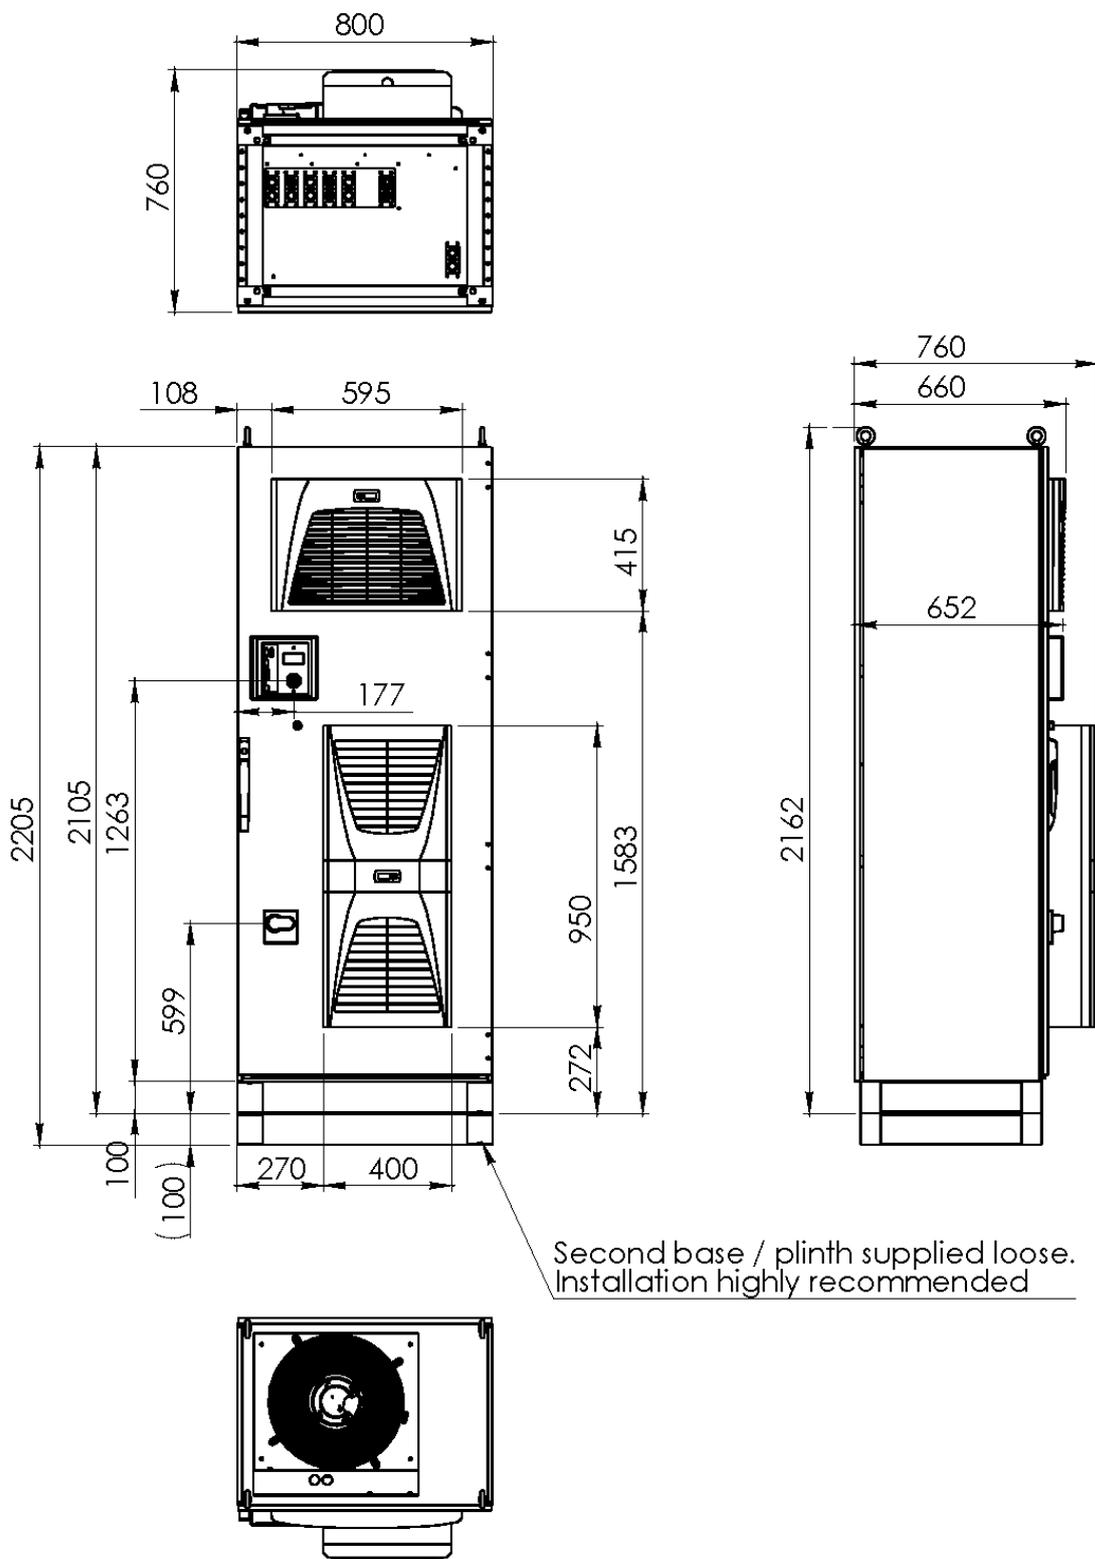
Dimensional drawings ECOsine® active FN3420-200-690-3 (with installed base 100 mm)\
